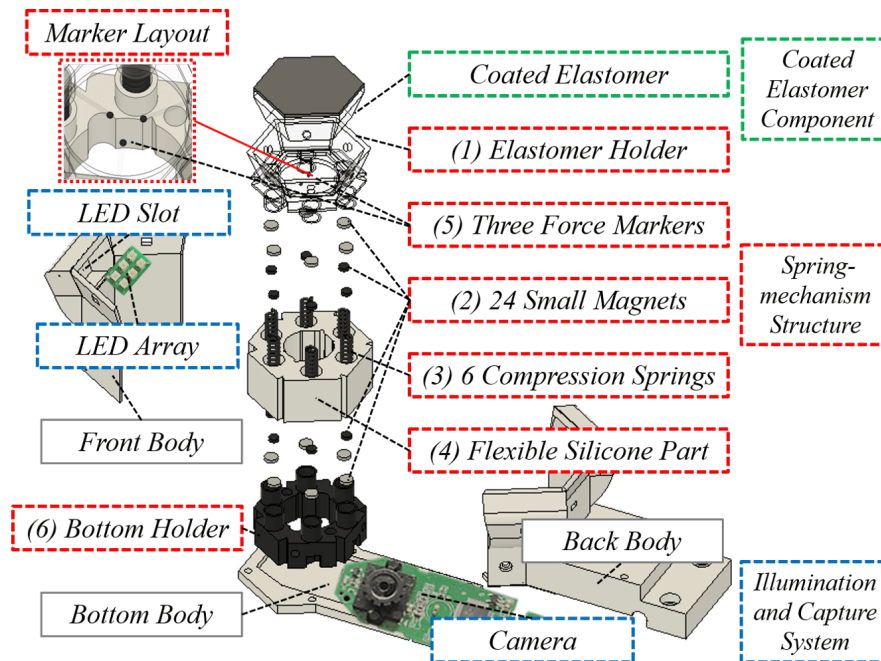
Exploded view of the proposed sensor spring-mechanism structure. Six parts (1)-(6) make up the structure: namely, the upper assembly, mid-section and lower assembly: (1) elastomer holder and (5) black markers compose the upper assembly; (3) 6 springs, (2) 24 magnets and (4) a flexible silicone compound compose the mid-section of the structure; (6) bottom holder composes the lower assembly.
